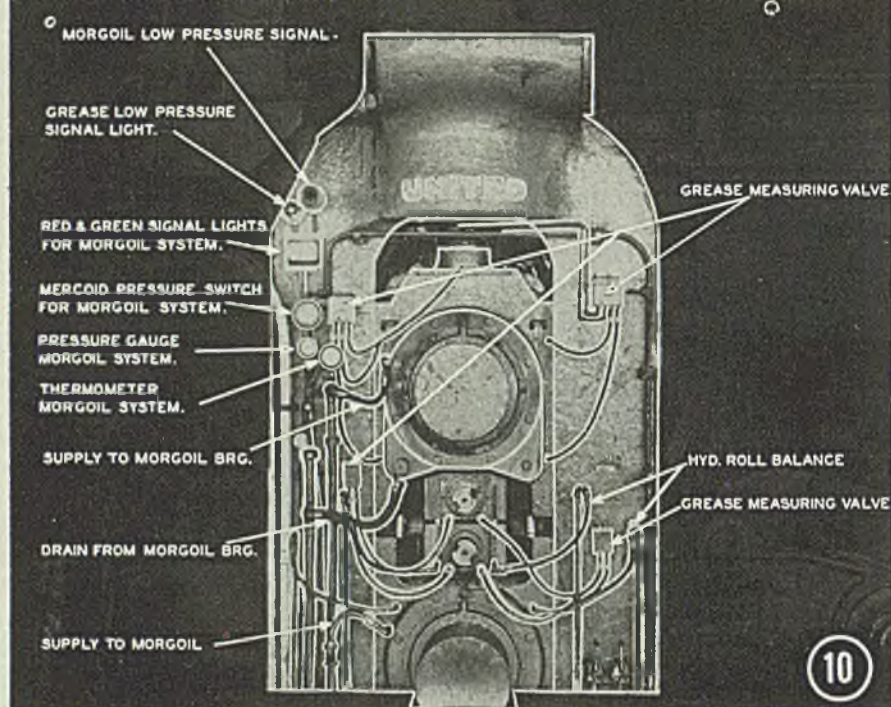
Side view of hot strip mill showing details of lubricating system serving bearings
